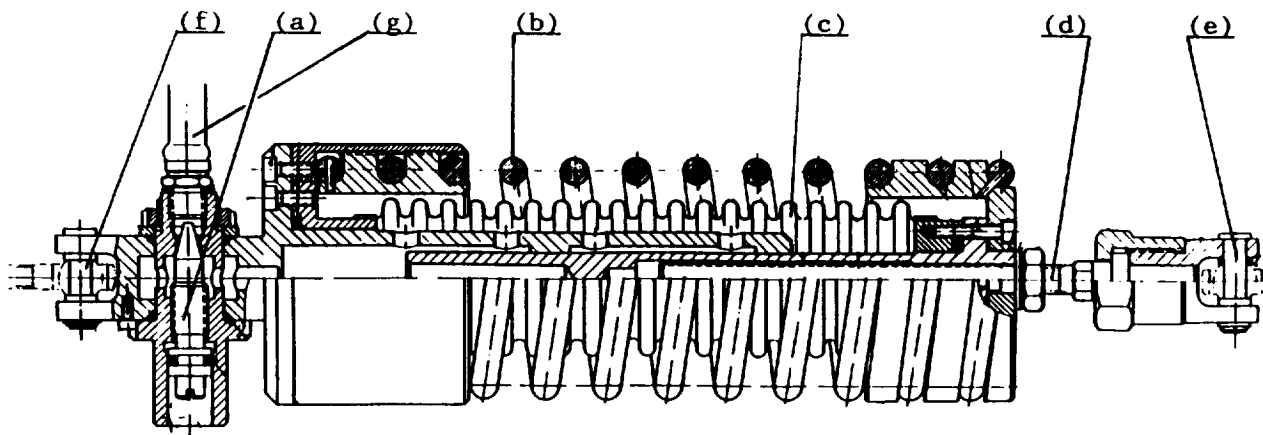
Damper main components: (a) regulation valve, (b) spring, (c) metallic bellow, (d) linear regulation rod, (e) docking ring support, (f) support flange bracket joint, (g) pipe.
